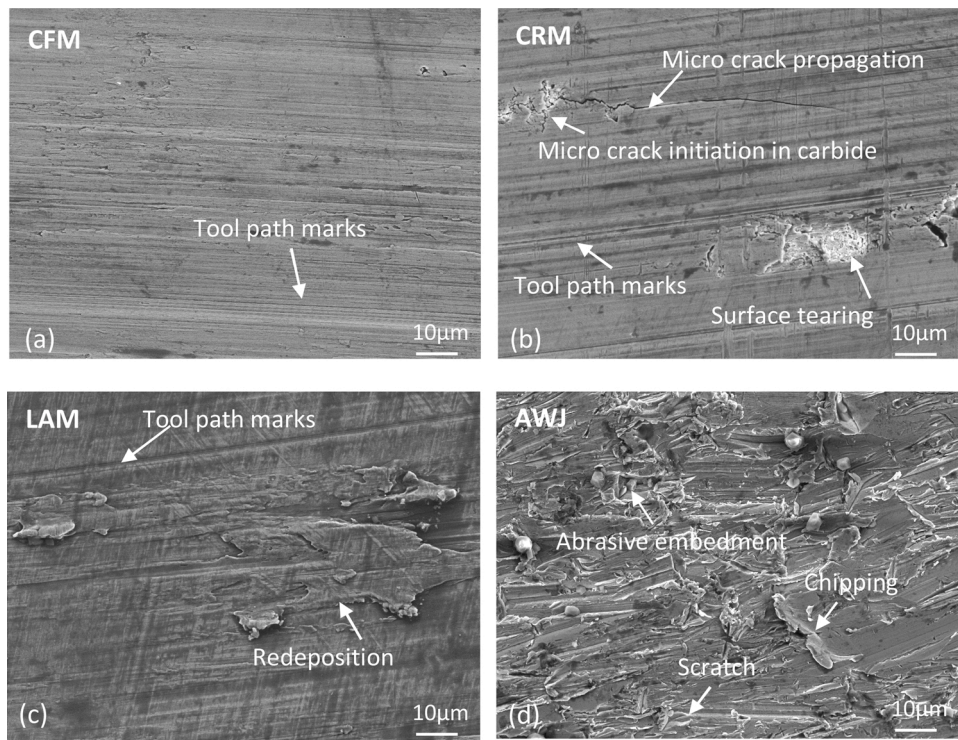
SEM observation of machined surface microstructure: (a) CFM with grooved tool path marks, (b) CRM with grooved tool path marks, micro cracks and surface tearing, (c) LAM with grooved tool path marks and redeposition and (d) AWJ with abrasive embedment, chipping and scratches.
